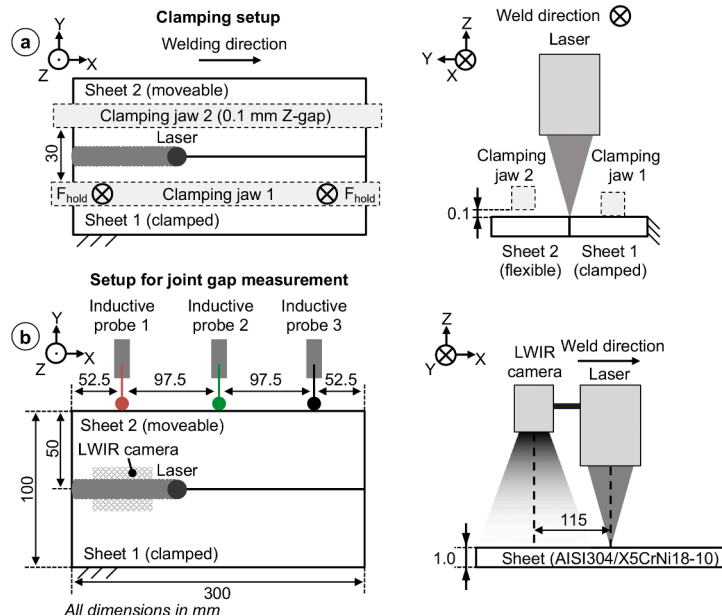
Schematic of the experimental setup, separate illustration of: a) used clamping setup, b) used setup for joint gap measurement.
